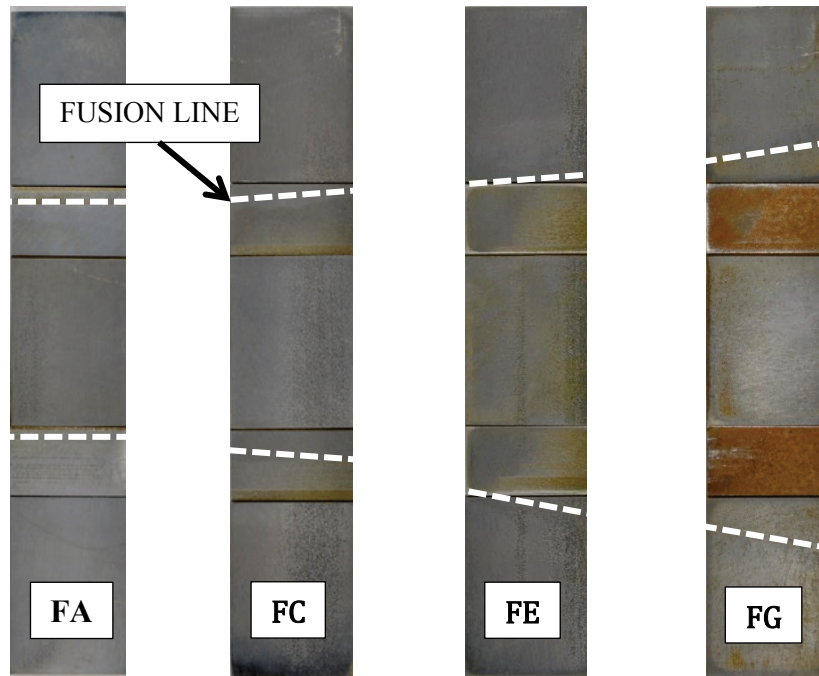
Side view of etched FA, FC, FE, and FG CVN blanks that were used to machine SS-3 & chemical composition specimens. Beginning with row G the entire SS-3 specimen was machined from weld [17].
